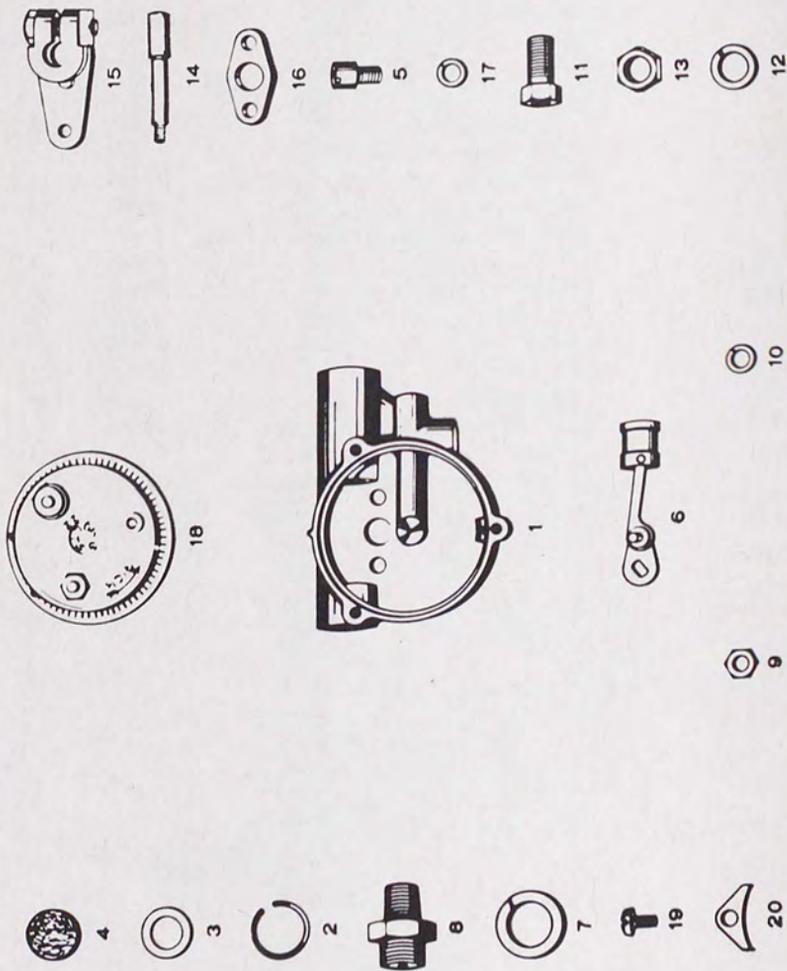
AUTOMATIC CHOKE—DISASSEMBLED
